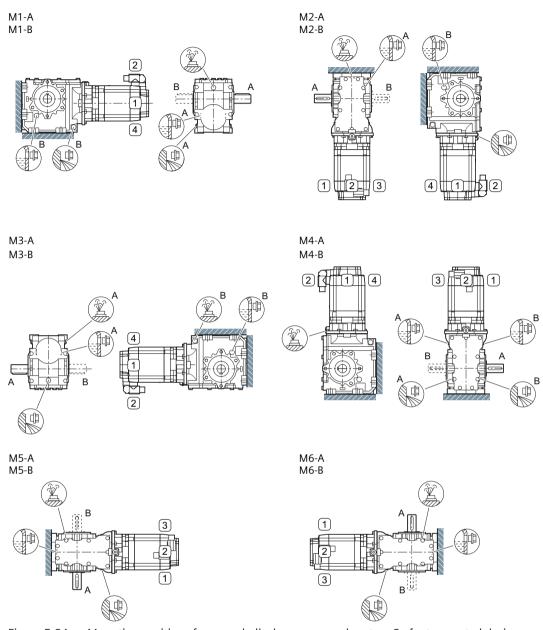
Mounting positions for servo helical worm geared motors C., foot-mounted design, frame size 39A, 2 stage
